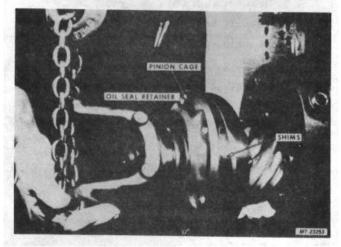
Removing Pinion and Cage Assembly SEPARATE PINION FROM CAGE
